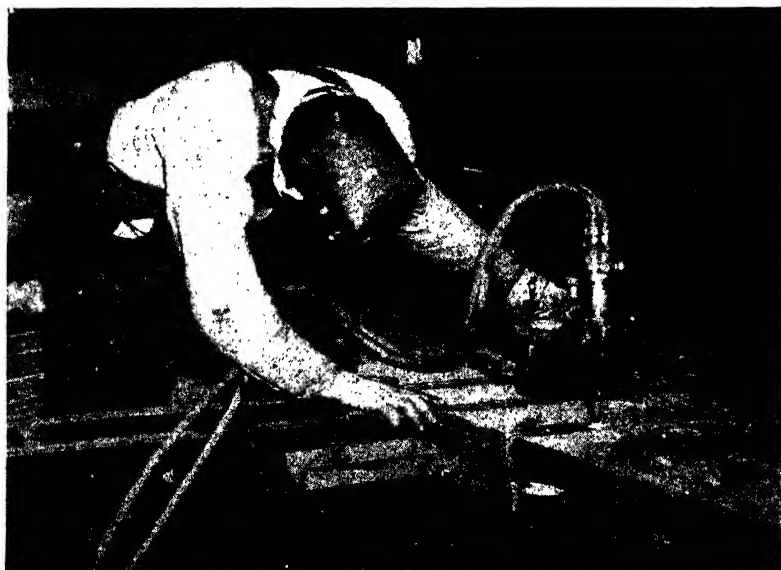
A portable flame-cutting unit on the job. (Courtesy of R. G. LeTourneau, Inc.)
